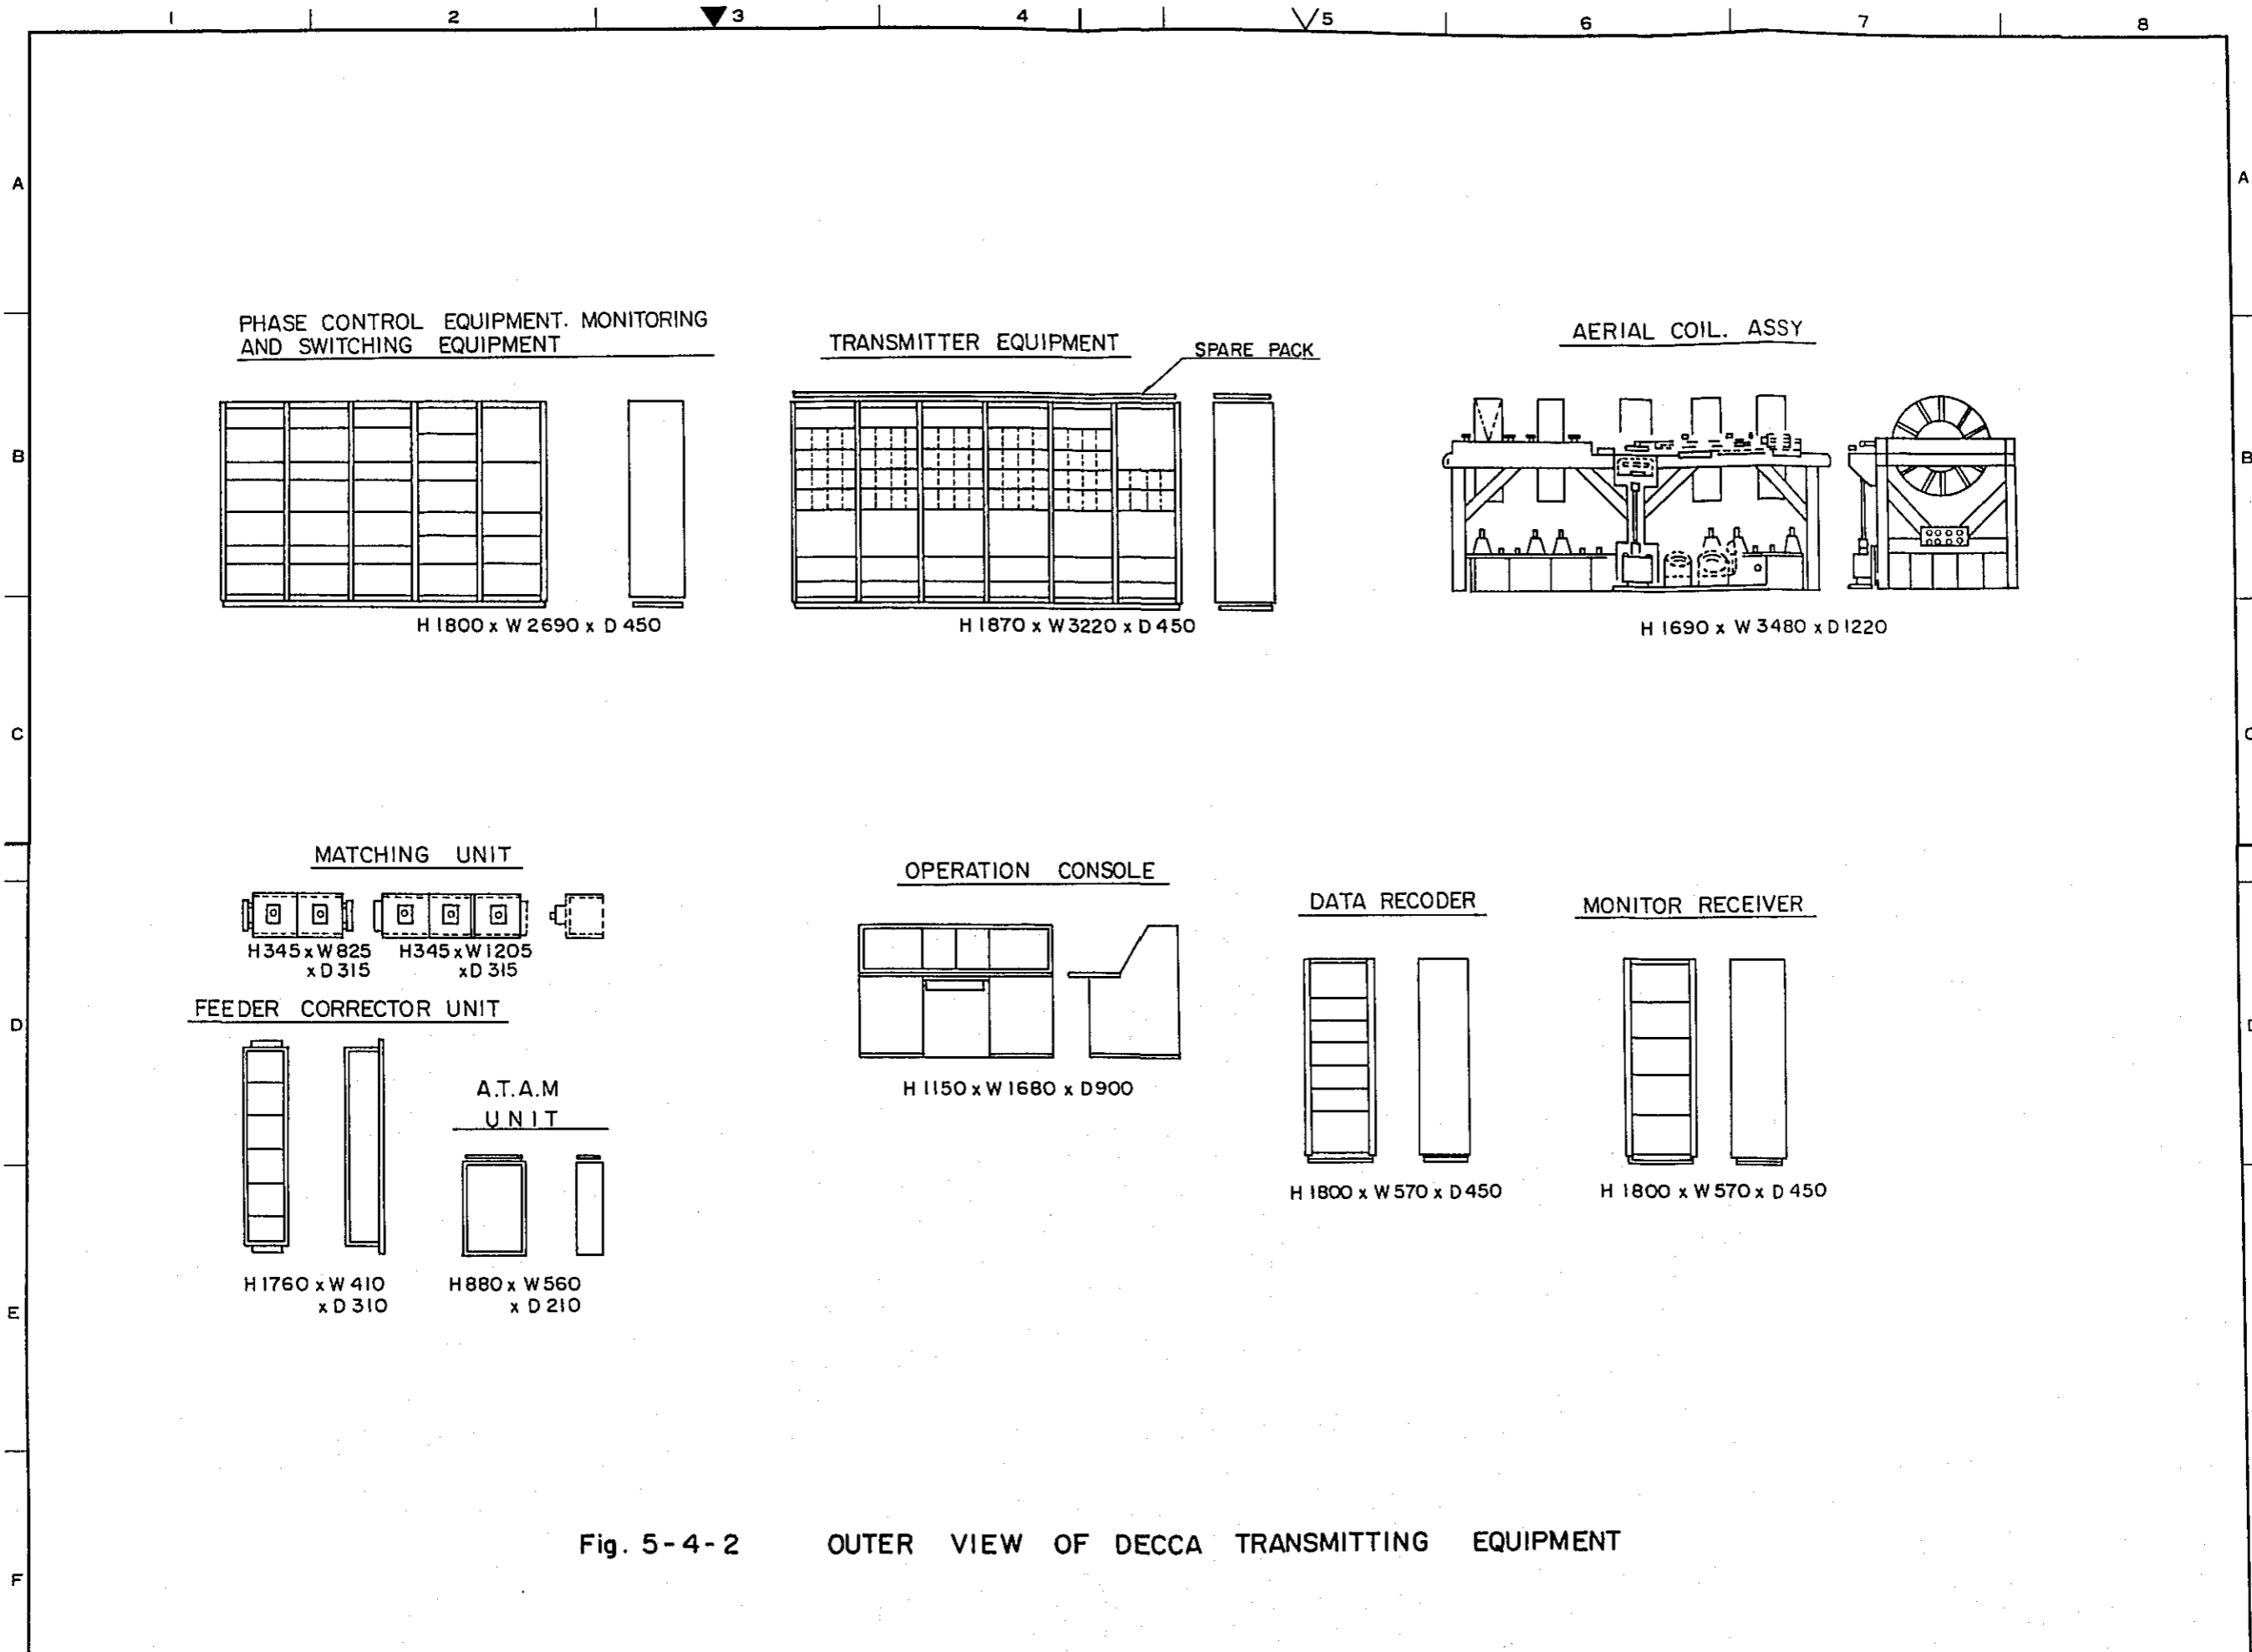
OUTER VIEW OF DECCA TRANSMITTING EQUIPMENT
